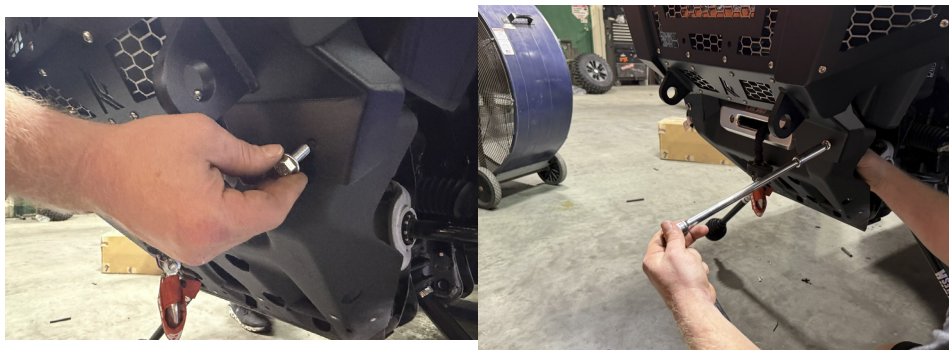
& FIG 25 - Mount lower portion of bumper to the vehicle and tighten all mounting hardware
